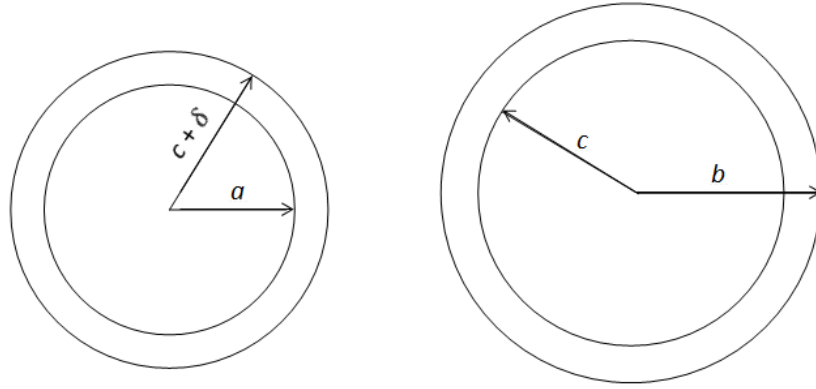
Shrink fit geometries for inner (left) and outer (right) cylinder.
